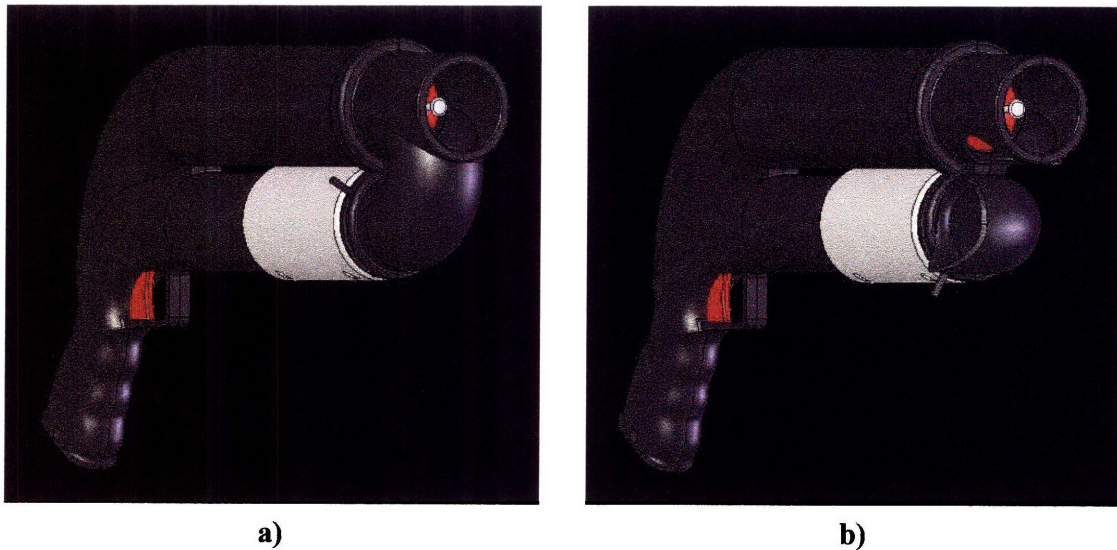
Loading of the alpha prototype is accomplished by rotating the elbow piece and placing balls in the lower tube.
